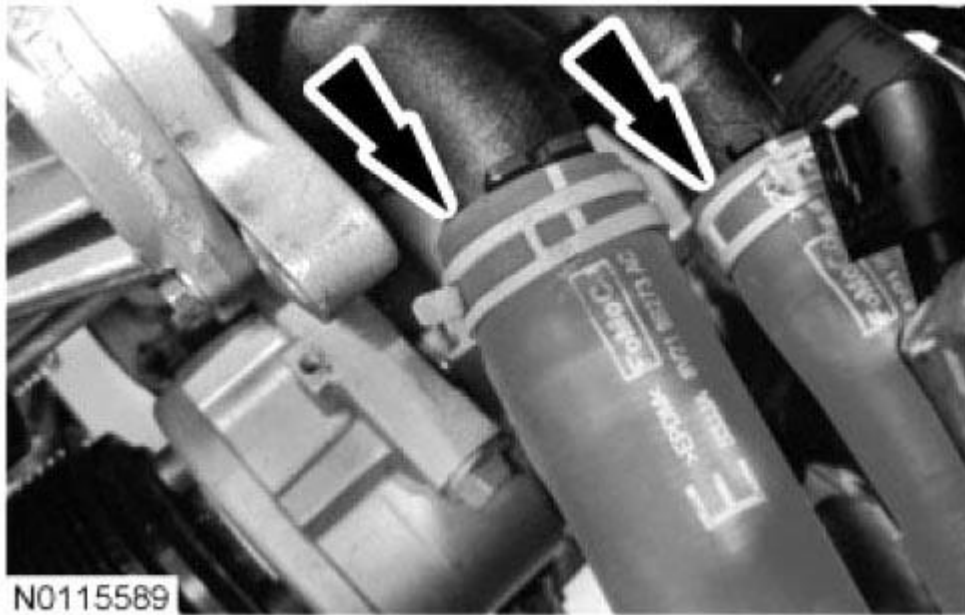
Locating Lower Radiator Hose And Coolant Hose From Thermostat Housing
